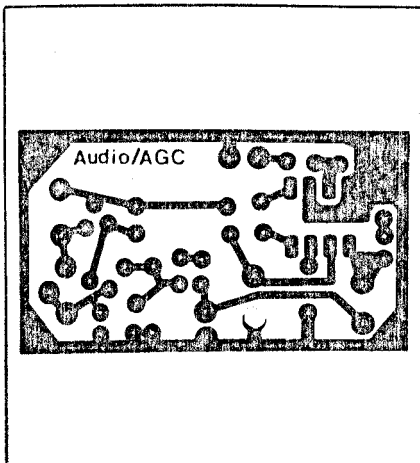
Parts-placement guide for the audio module. This view is from the component side of the board. Gray areas represent an X-ray view of the unetched foil. A full-size etching pattern is shown below.
